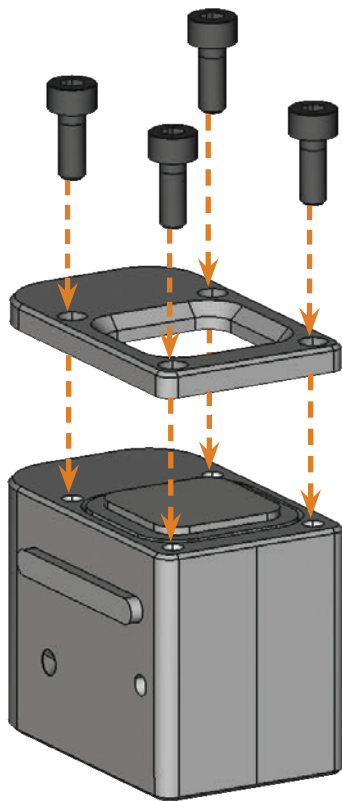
ASSEMBLING A TOOL MAGAZINE
